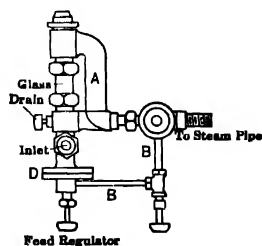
Sight-feed Lubricator (Forced-feed Type).
